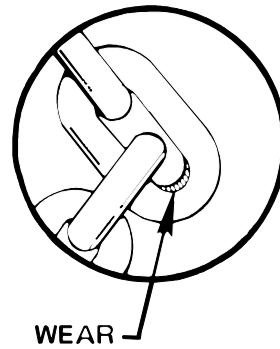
Check Chain Wear at Bearing Surfaces Between Links
